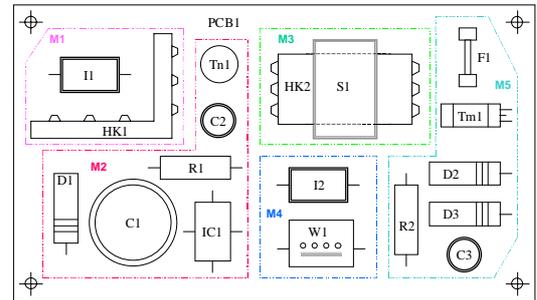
An Example of PCB Layout for Switching Power Supply Products
